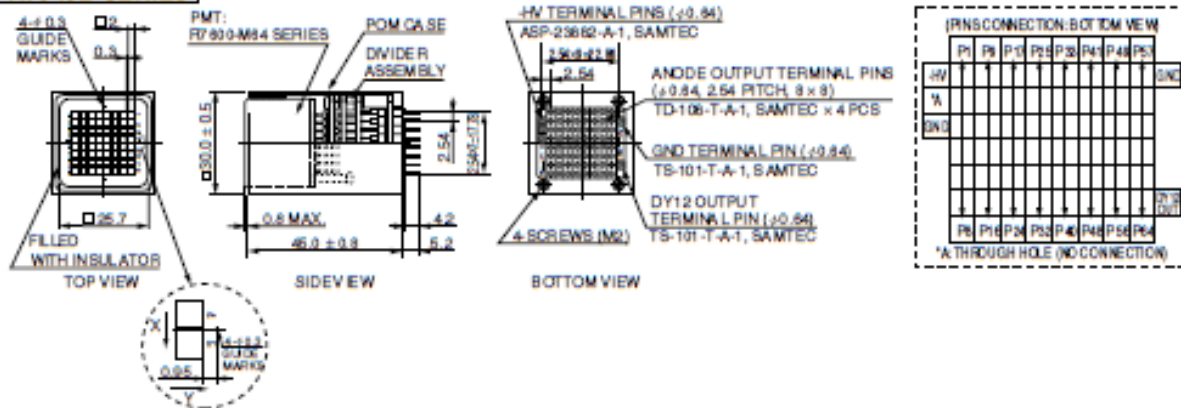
Dimensional Outline and Basing Diagram (Unit: mm)
